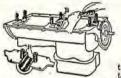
Scraping upper halves of the crankshaft main bearings in their seat. Bearings should be firmly
